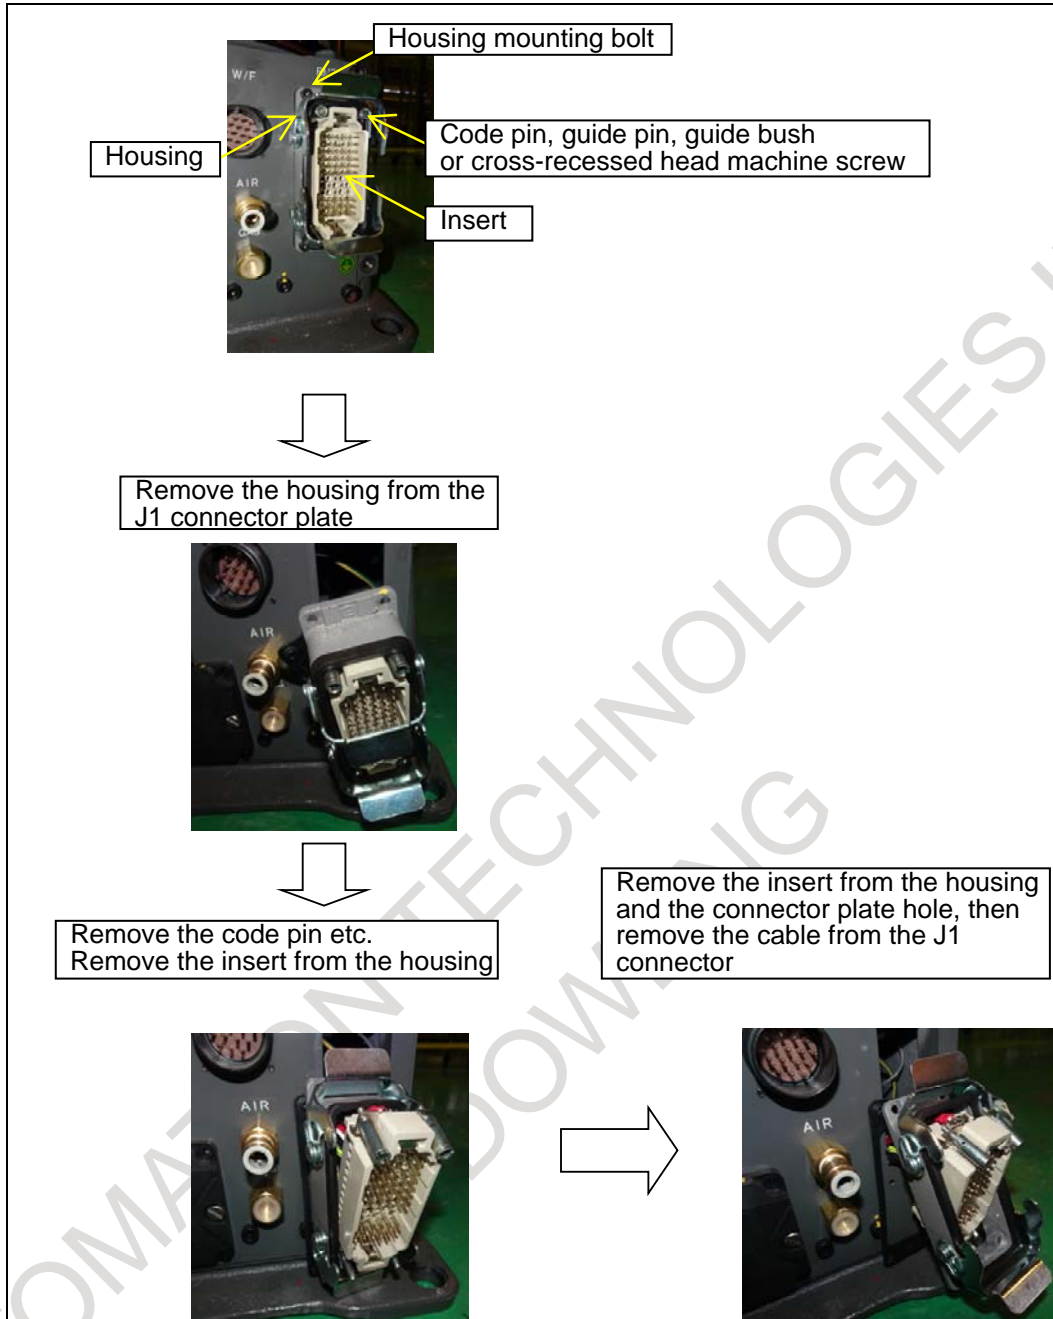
(k) Removal method of the Harting connector (J1 connector plate part 2)
